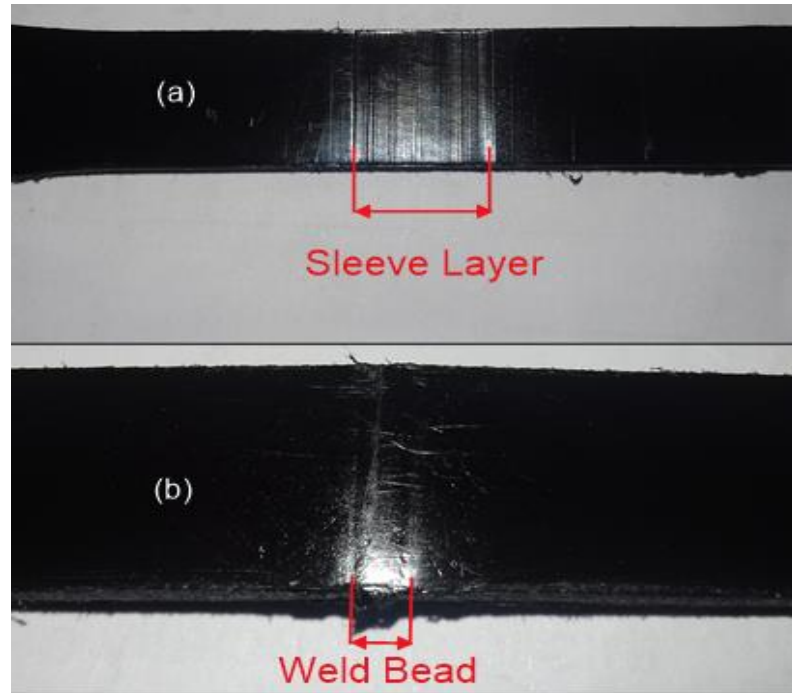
Examples of good surface on top of the weld (a) and bottom (b).
